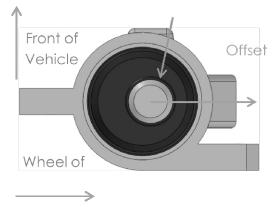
RHS Control Arm Rear Bushing Offset direction - View
